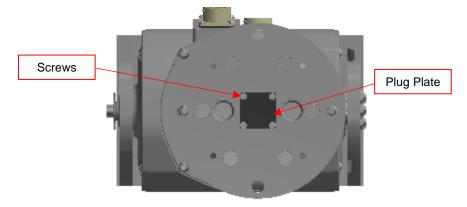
Remove the (4) Bolts Securing the Plug Plate
